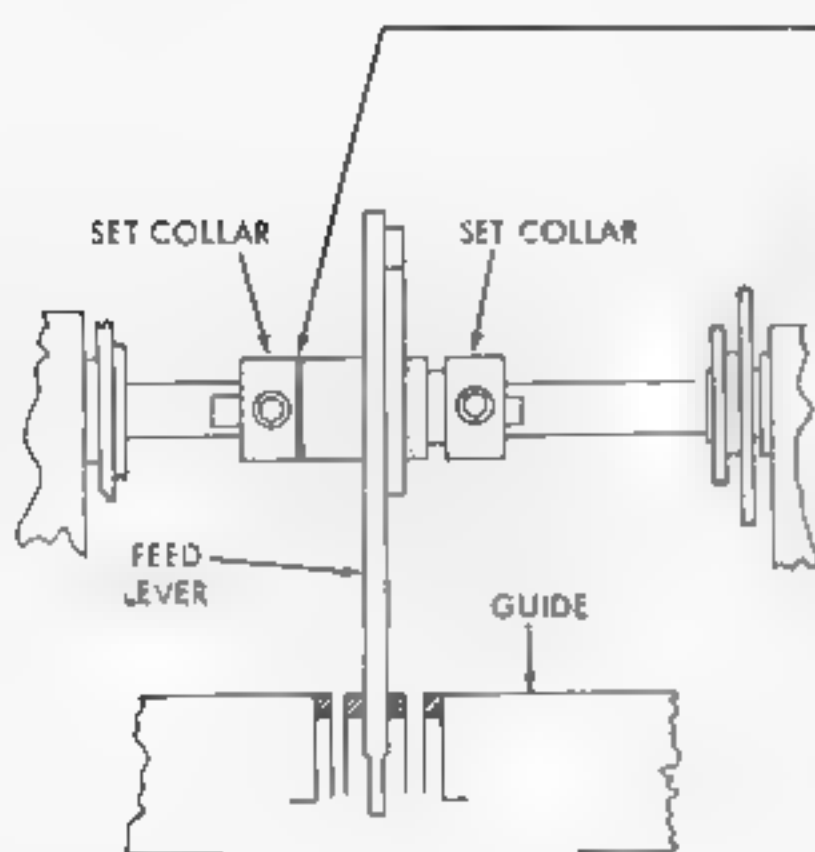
DISTRIBUTOR CONTACT MECHANISM
